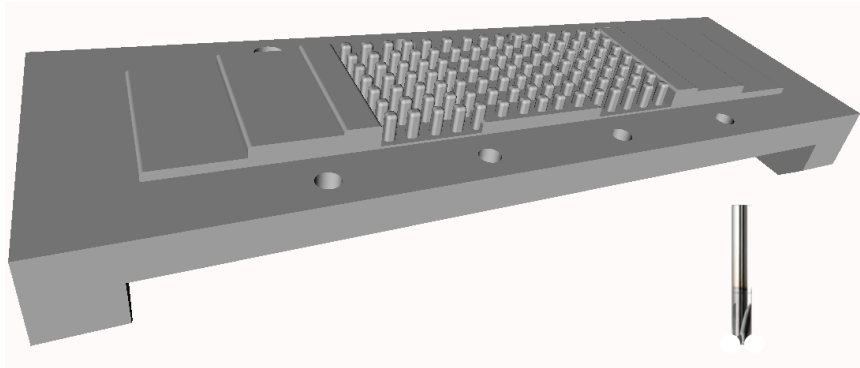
Case 4: CAD picture of a micro milled aluminium microwave filter and corner rounding milling tool
